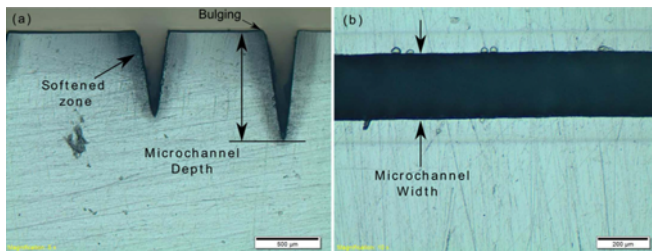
(a) Cross-sectional view and (b) Top view of microchannel
